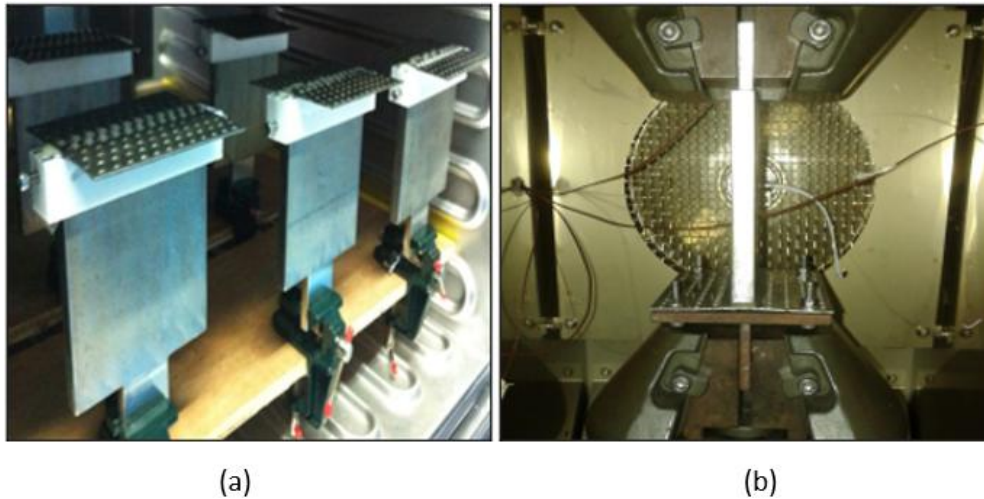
(a) Pre-cure of adhesive T-joint in furnace and (b) Tensile test in thermostatic chamber.
